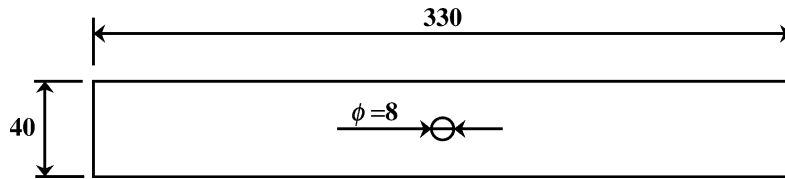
Schematic description of the sample geometry. It consists in a 2024 T3 aluminium sheet of 1.6 mm thick, 330 mm length and 40 mm large. The laser machining performs a central hole of 8 mm diameter by orbital drilling to obtain a concentrator factor $K_t = 2.5$.
